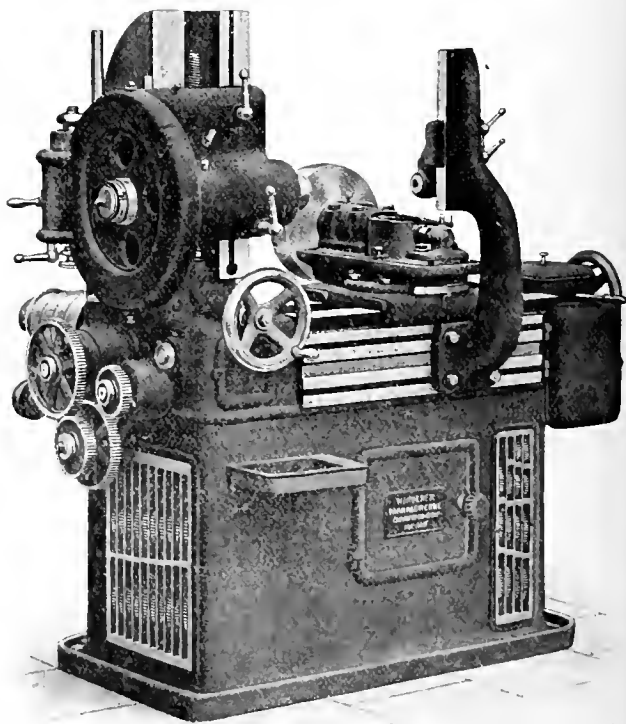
The Wanderer Spur Gear Hobbing Machine.
